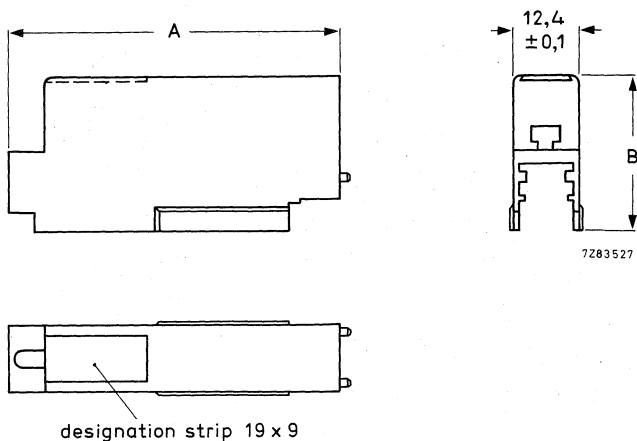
Cable hood; see Table 4 for dimensions A and B.
